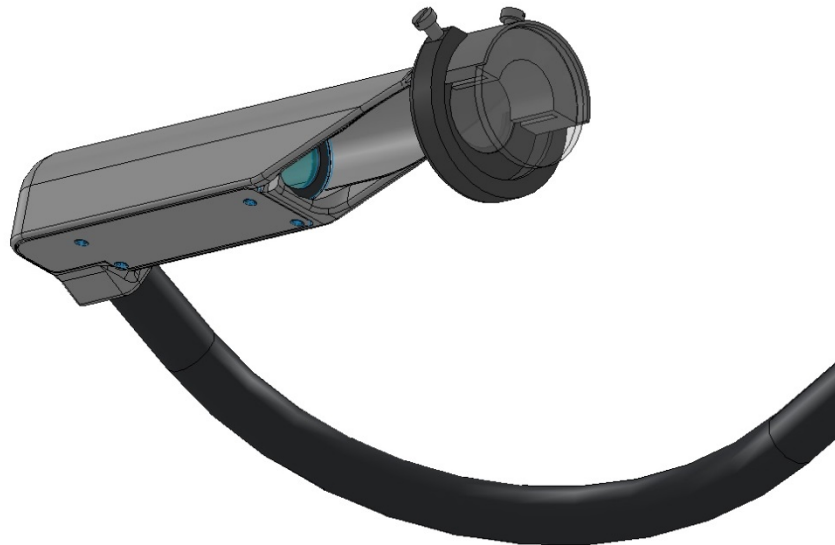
Optical Filter Assembly Mounted on Transmitter
